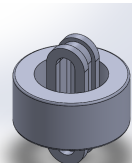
Solidworks assembly of the two drive cores nested to form the miniature hybrid design.
